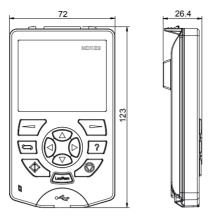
Mounting dimensions of the MDKE9 external operating panel (unit: mm)
